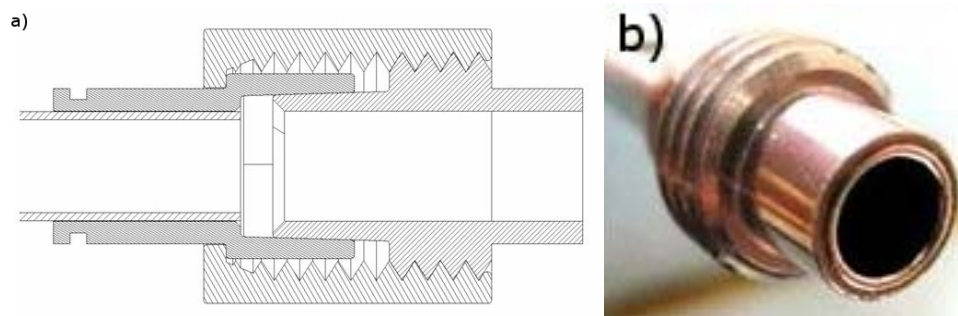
(a) Concept for tapered aluminum, metal-to-metal fitting; (b) fitting with welded aluminum pipe.
